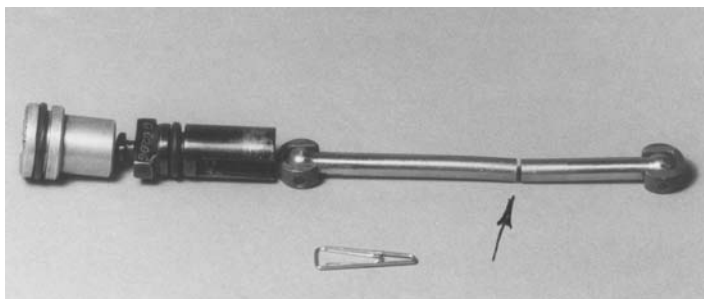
Failed shaft showing the location of fracture
